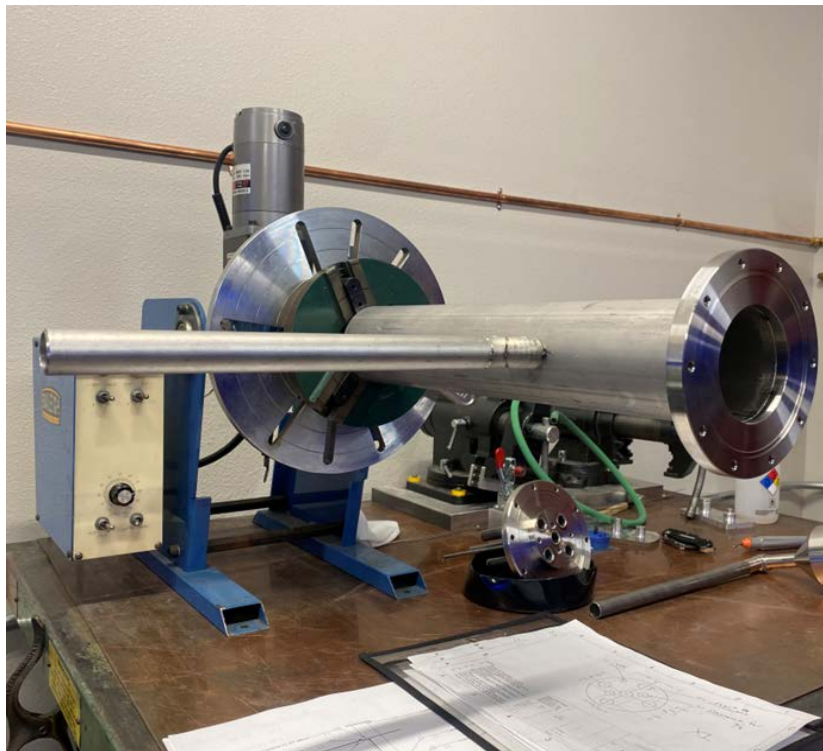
Vessel body prepared for welding.
